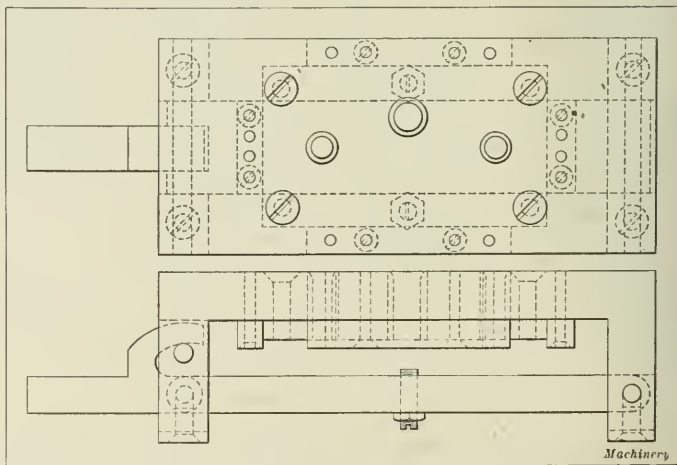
Jig Suitable for making Large Number of Pieces like that shown in Fig. 8
